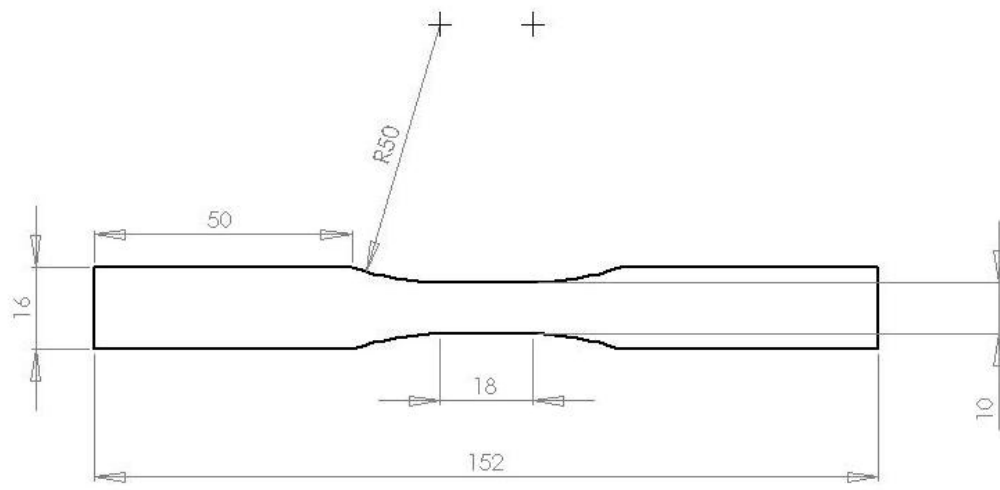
Uniaxial test specimen (dimensions in mm) [18].
